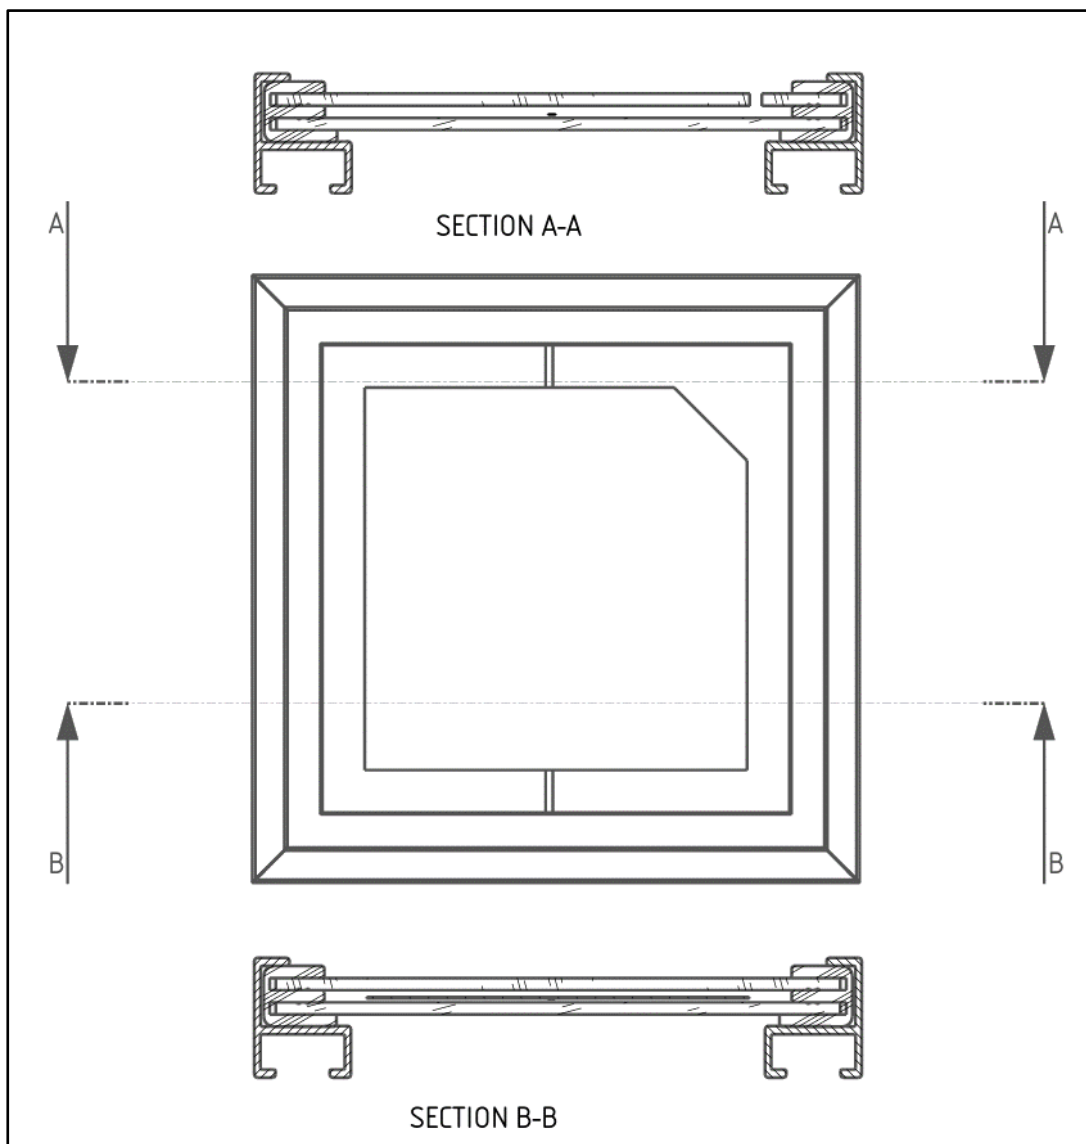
Top view of the proposed improved version containing section views A-A and B-B. Section view A-A showcases the fill port while B-B shows the overall cutout view of the assembled module.
